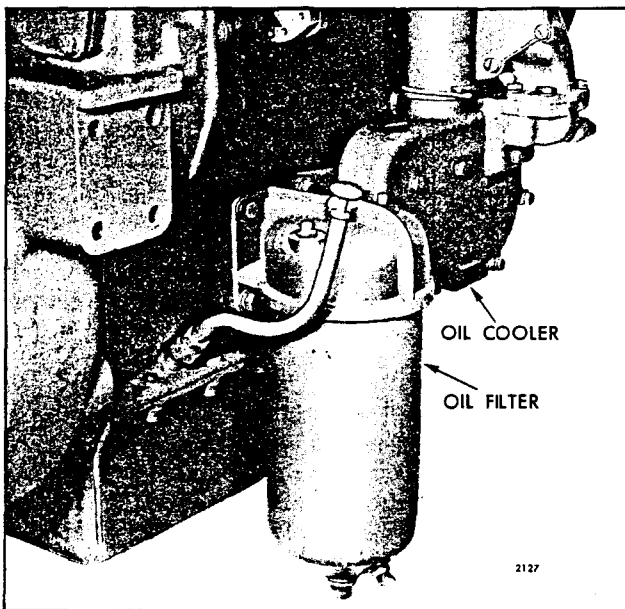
Typical In-Line Engine Oil Filter Mounting
